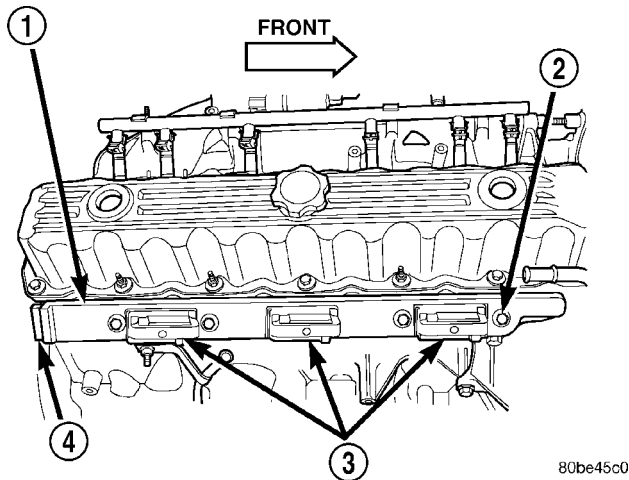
Ignition Coil Rail Location—4.0L 6-Cylinder Engine
